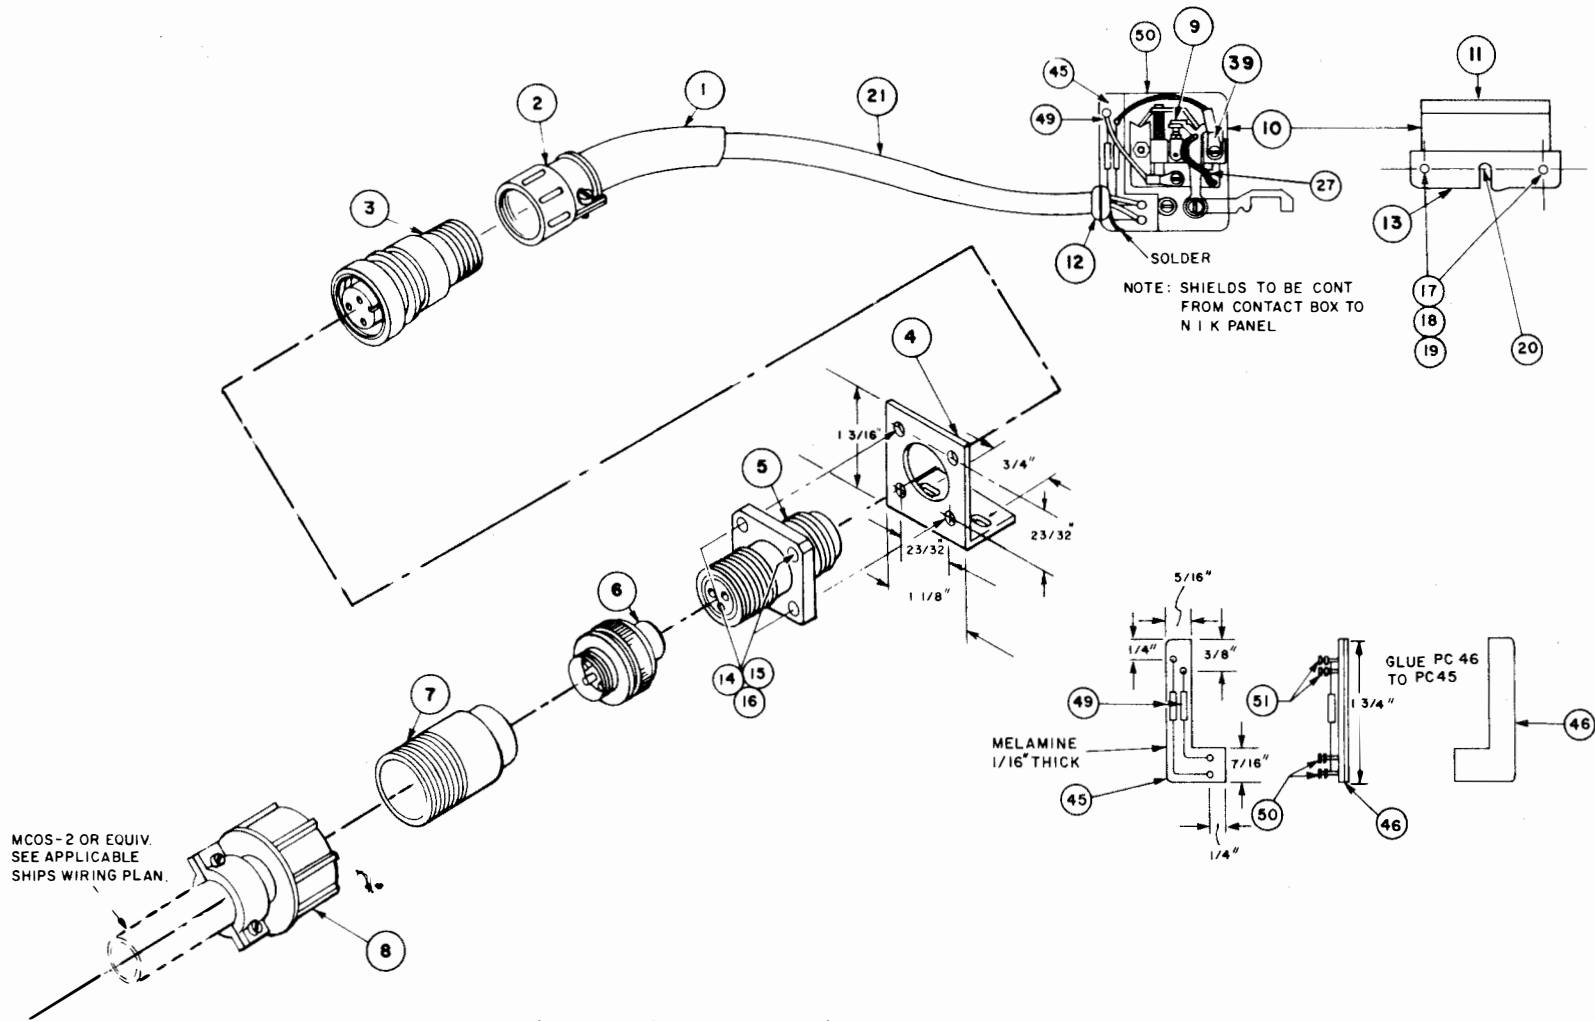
TT-187A/UG and TT-187B/UG Installation Drawing (Part 2)
